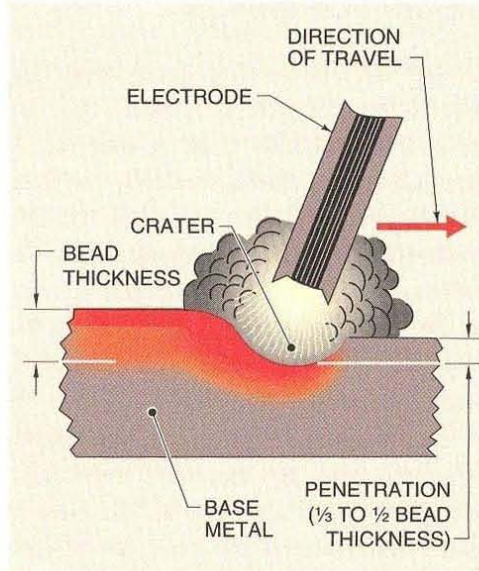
The correct electrode angle is required to make a proper weld.
